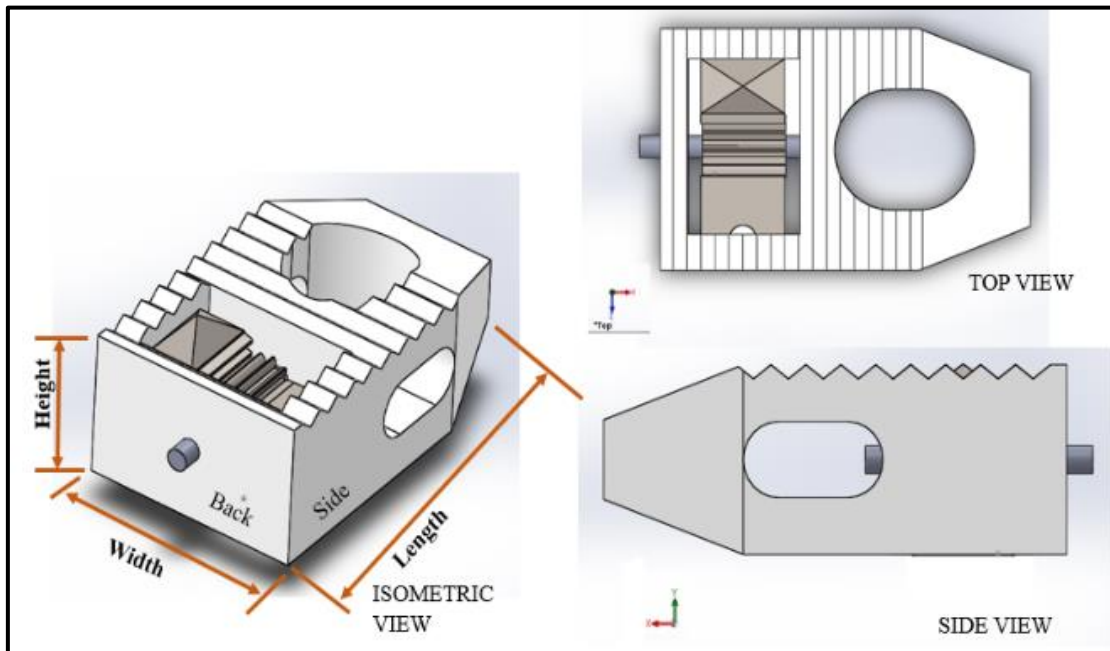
Three-dimensional model of cage implant for model-1: Isometric view (left), Top view (top right) and Side view (bottom right)
